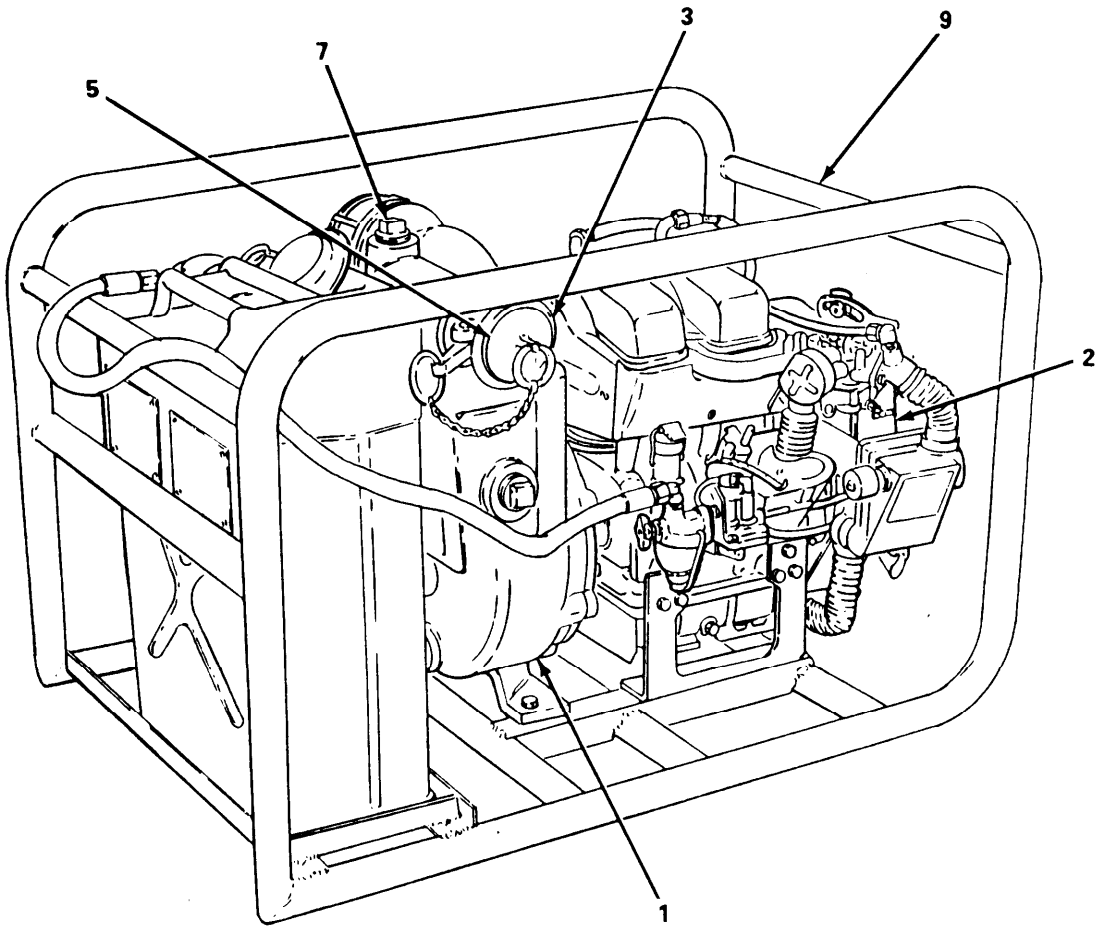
Pump/Engine Assembly (Sheet 1 of 2).
